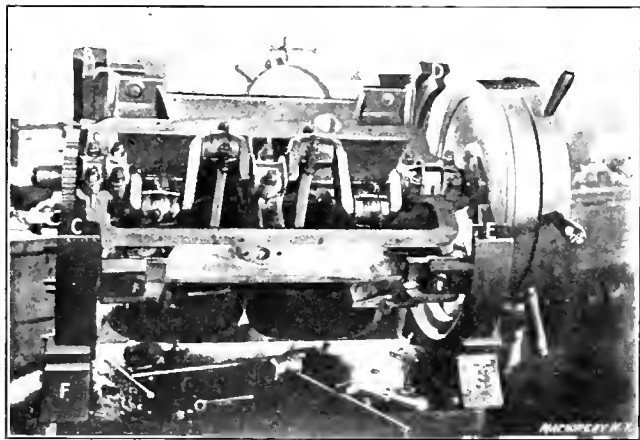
Revolving Fixture in which Rods are assembled on the Cranks
